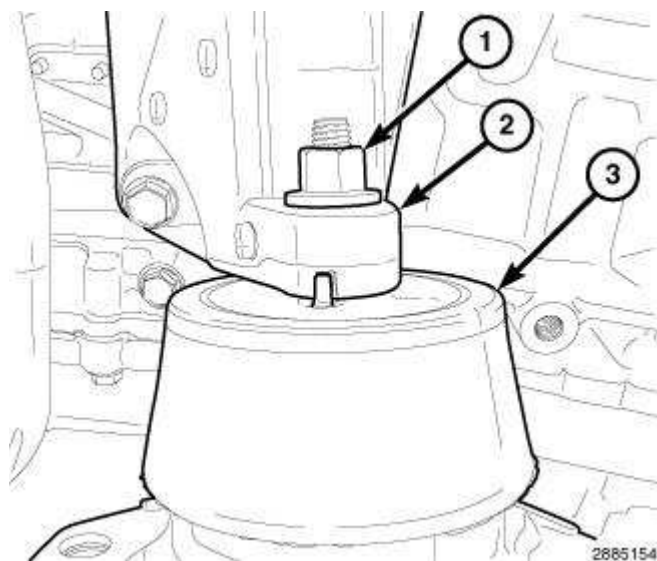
Left Engine Mount Isolator & Upper Retaining Nut
